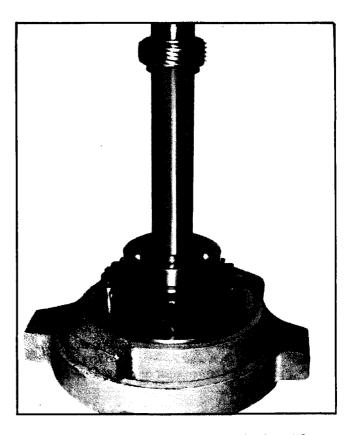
C-15 Removing Rear Bearing and 1st Speed Gear
